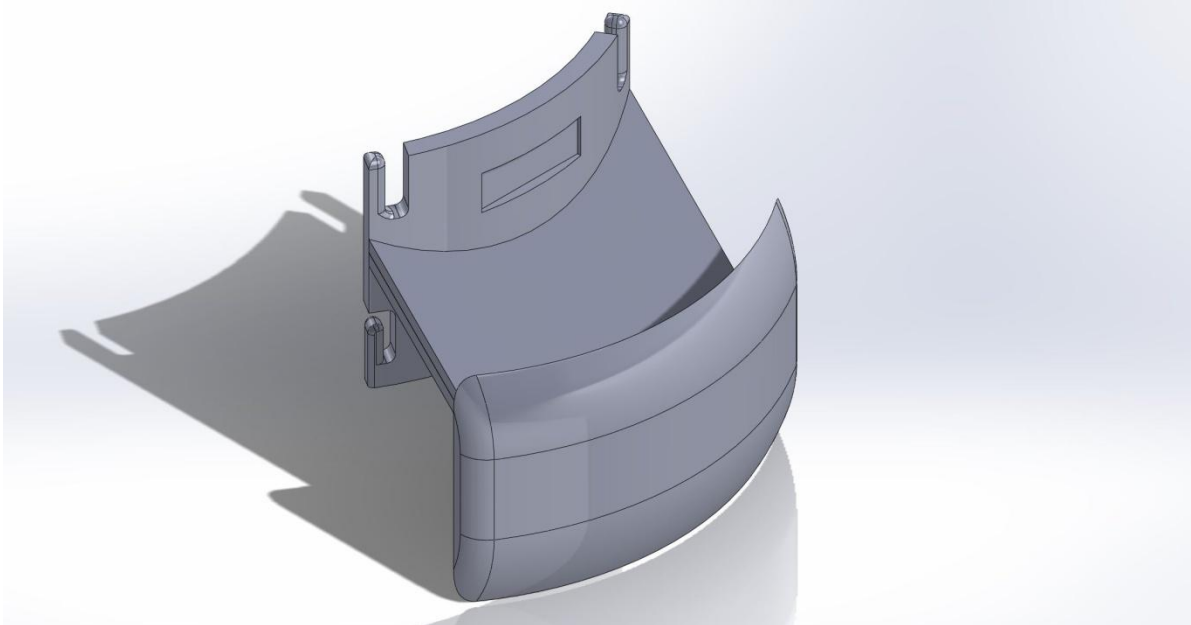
Solid Works CAD drawing of a completed individual airbrake. Note the slots for magnets and knobs on the edge for spring attachment.
